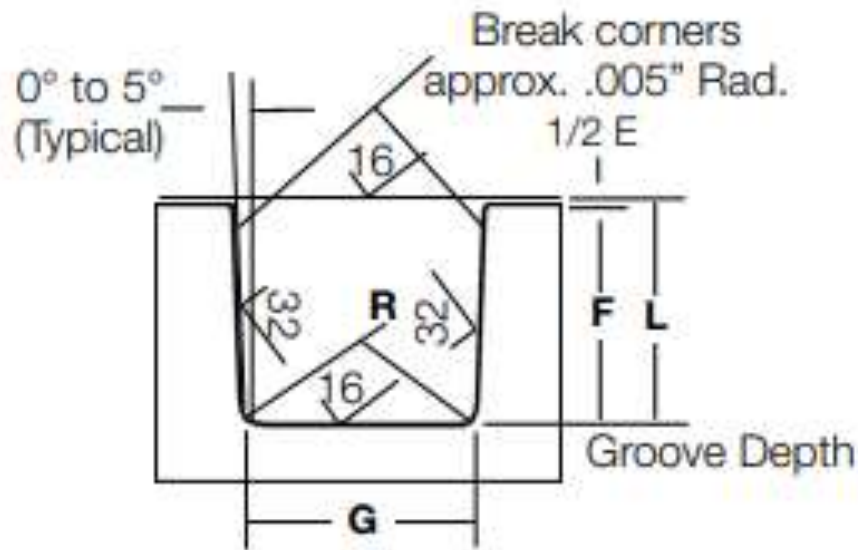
O-ring Static Face Seal Gland (credit: Parker)
